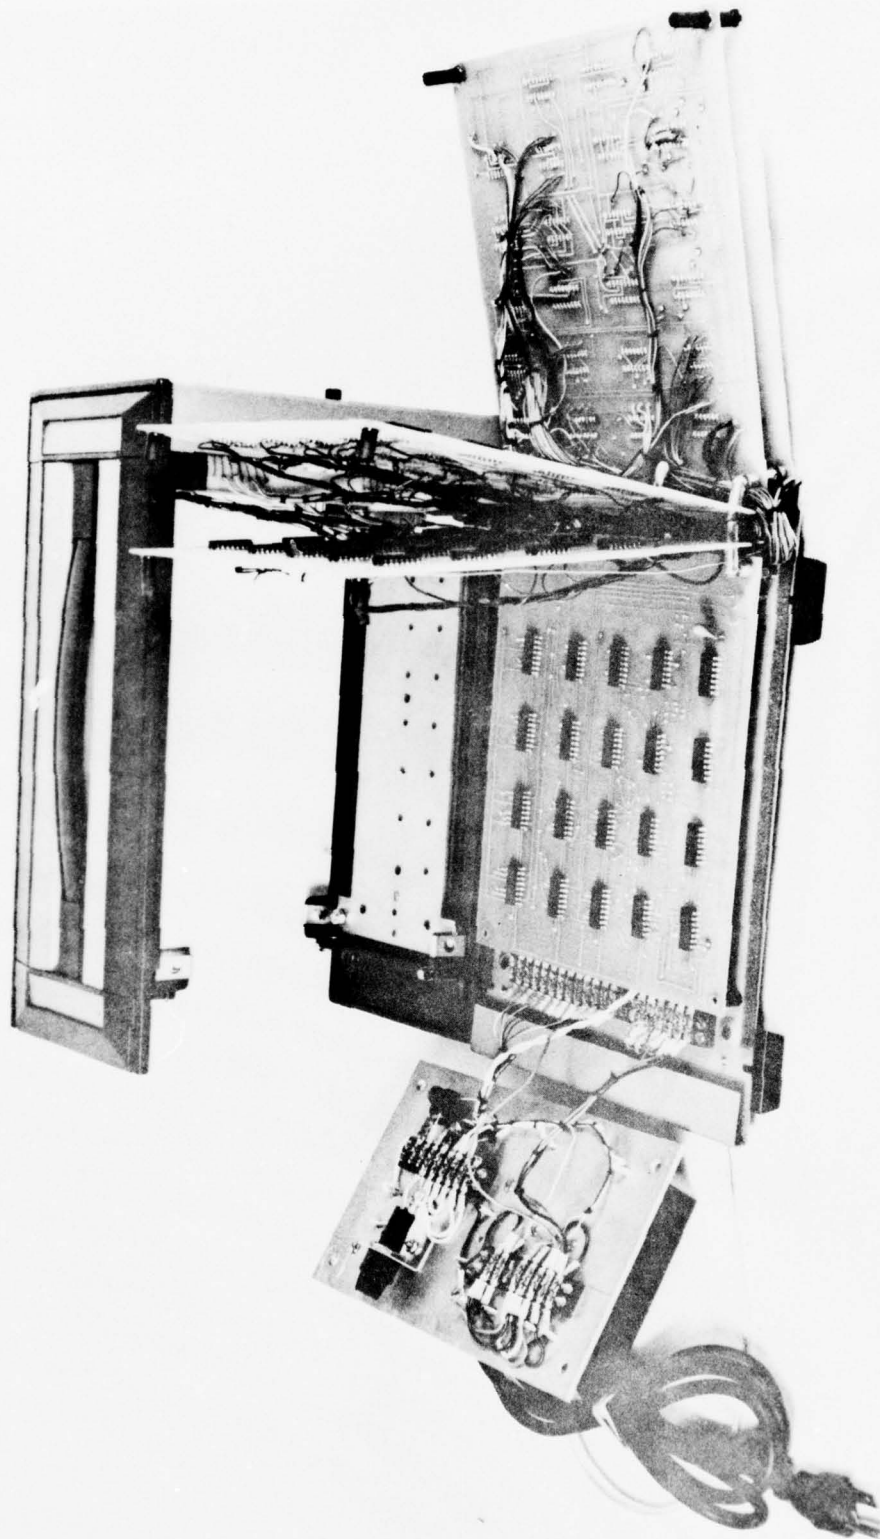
SSRD ASSEMBLY, VIEW 2
